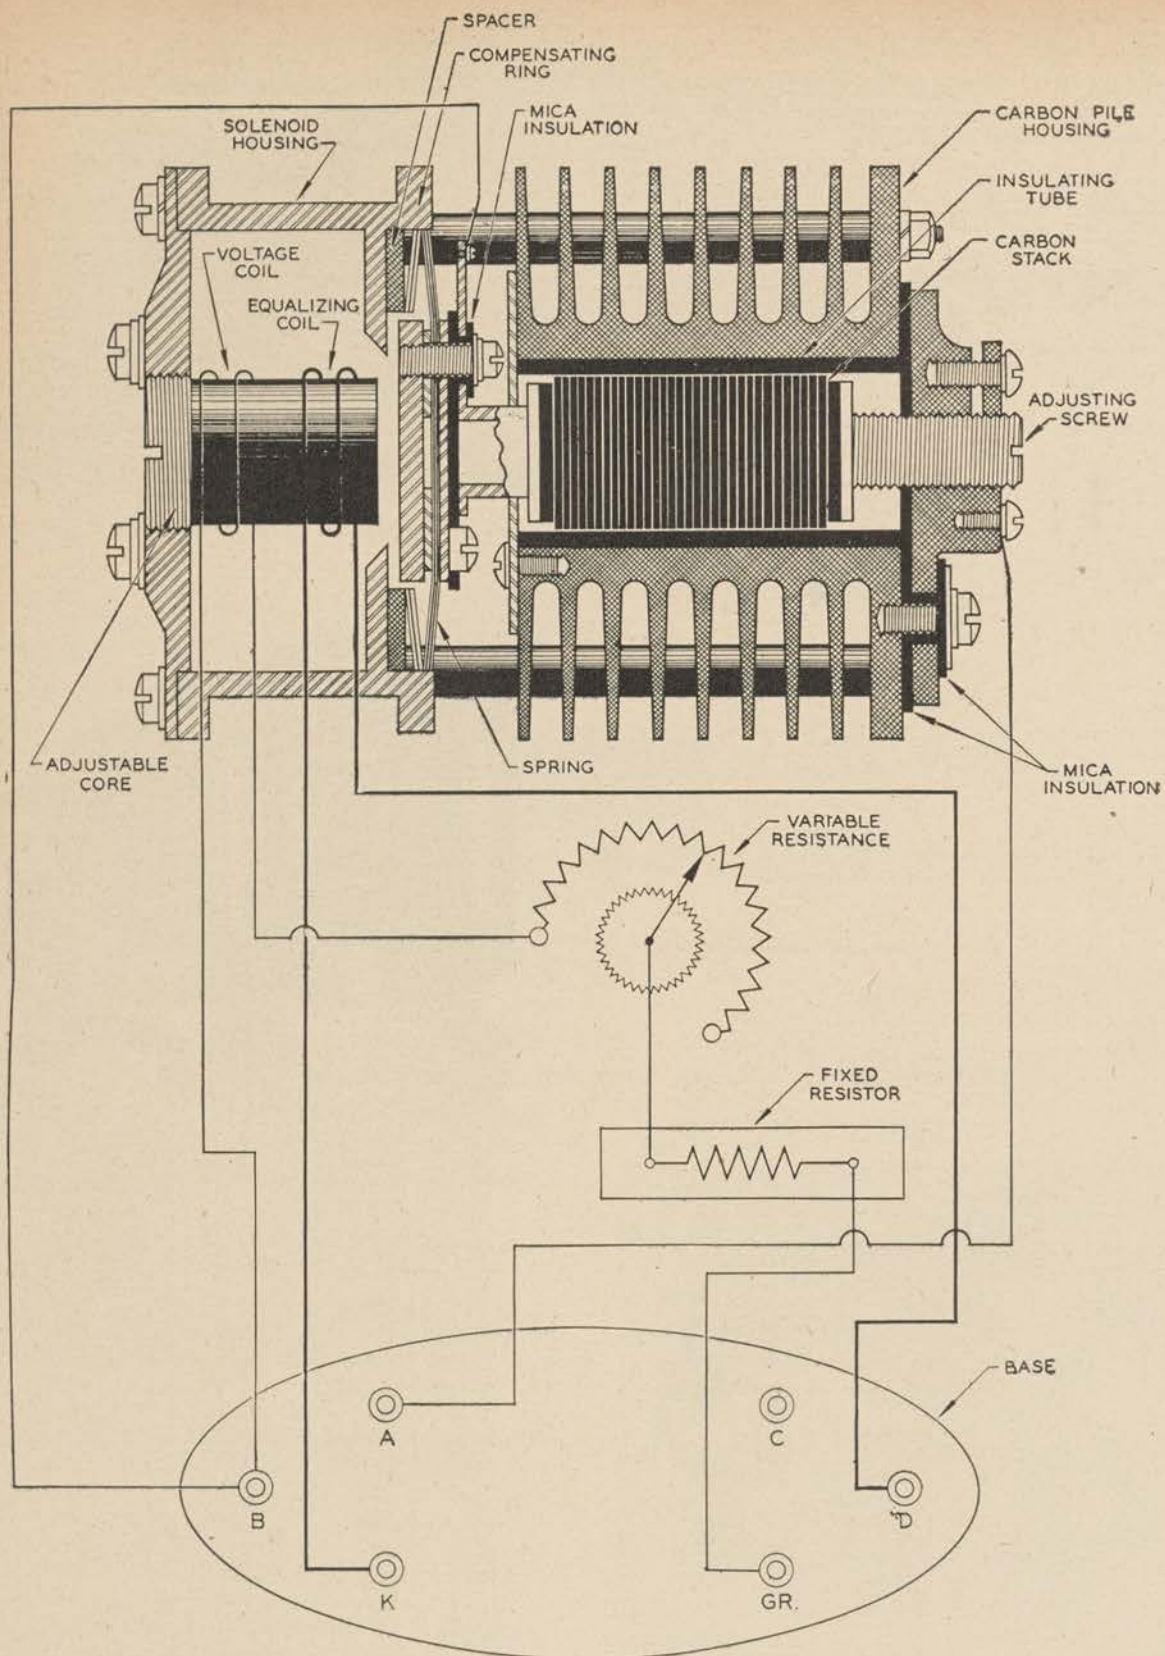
Detail drawing of Delco-Remy 24-volt voltage regulator showing internal circuits.
